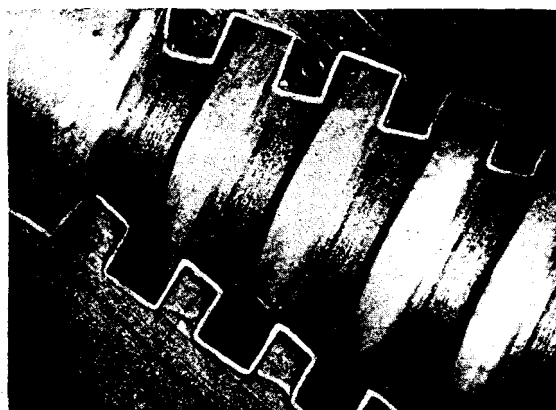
Cross-section of the electroformed horn; uniformity of deposit thickness over the entire profile is seen
